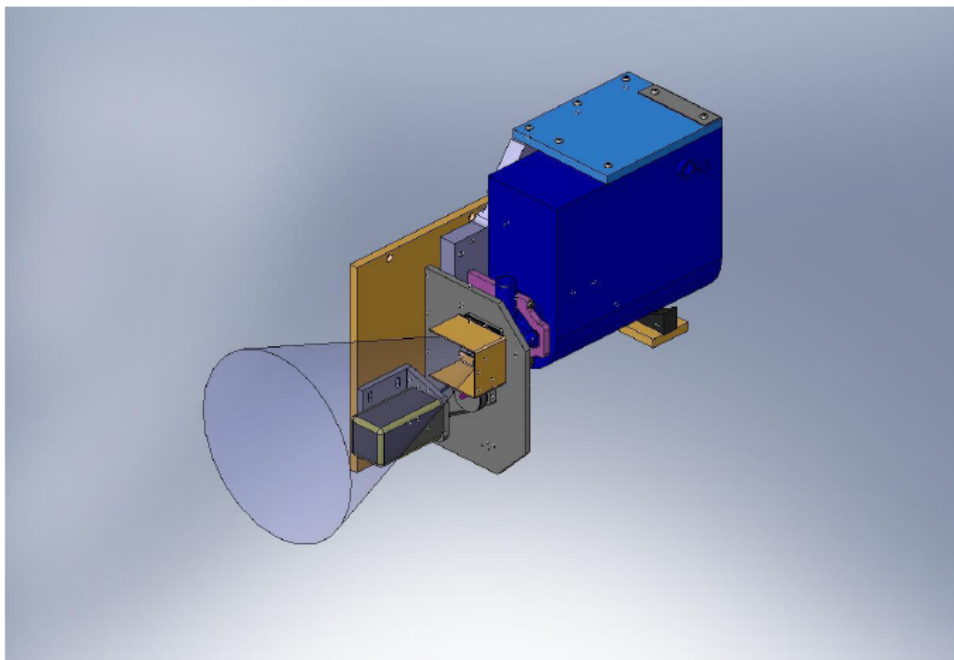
Kevex Mounting Assembly w/ Existing ORNL X-Ray Shutter
